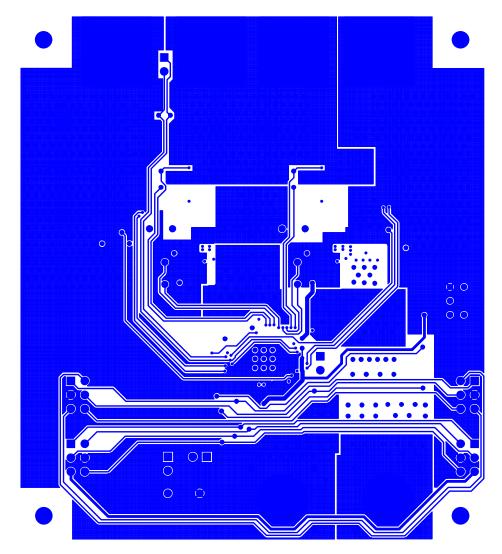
PCB - INNER LAYER 2 (TOP VIEW)
